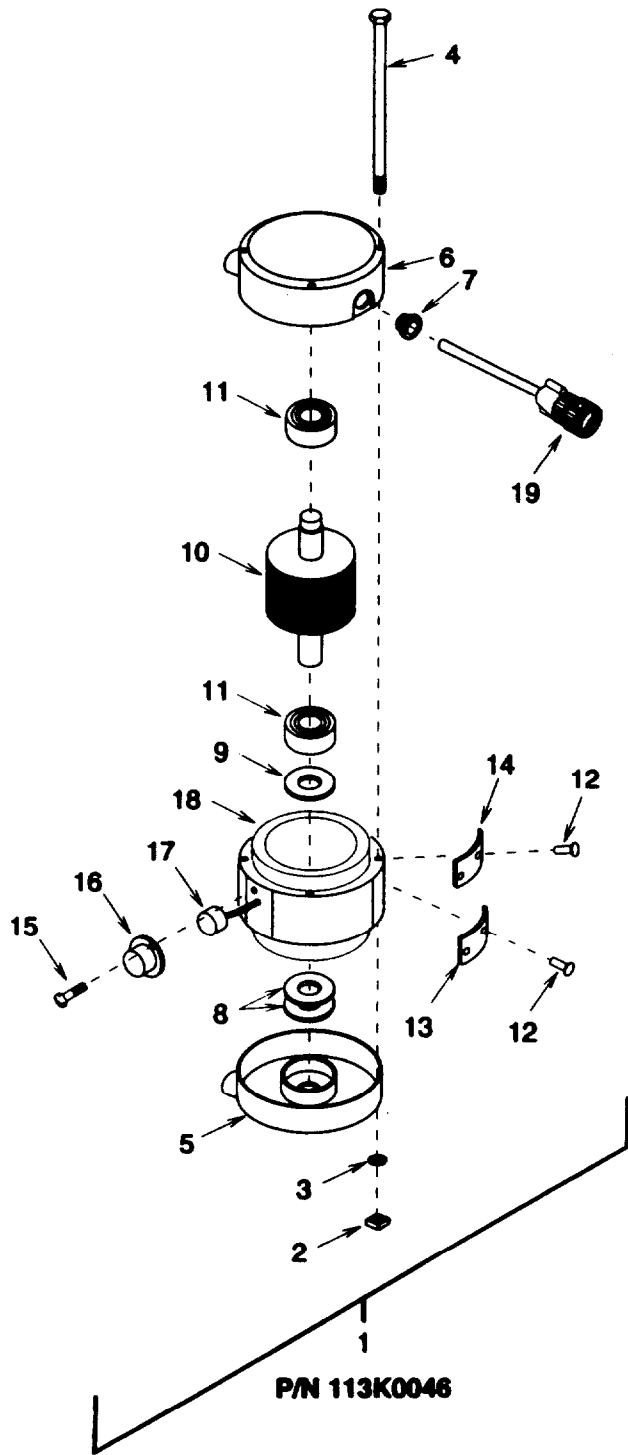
Evaporator Fan Motor (Sheet 1 of 2)
